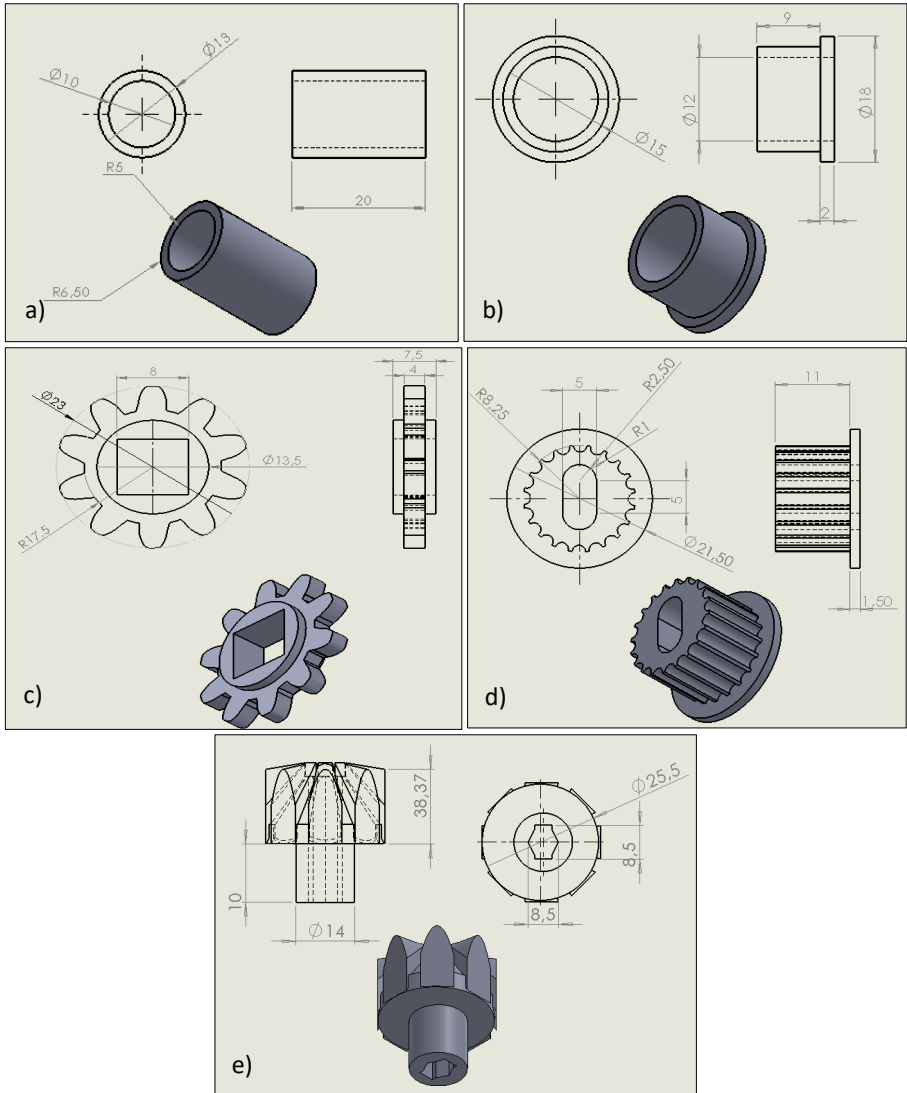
Technical Drawings of All Sintered Components (Dimensions in mm)
